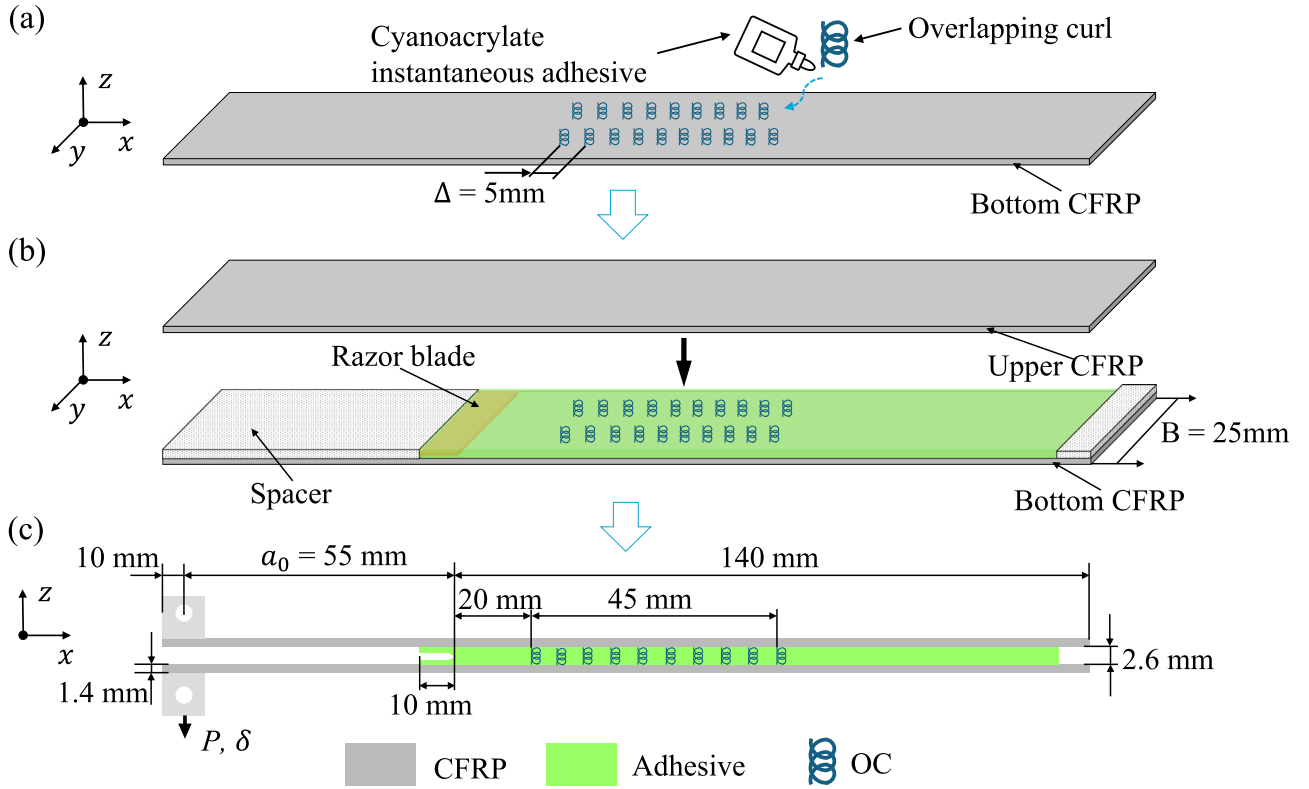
Schematic illustration of the fabrication process and dimensions of DCB samples with through-thickness OC reinforcements in the adhesive bondline.
